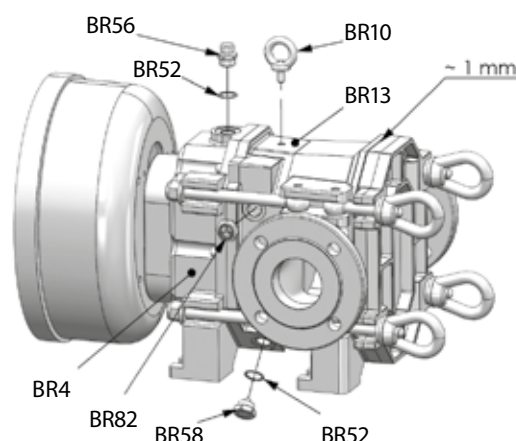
Assembly of oil plugs and checking the compression of the rubber on the lobes.
